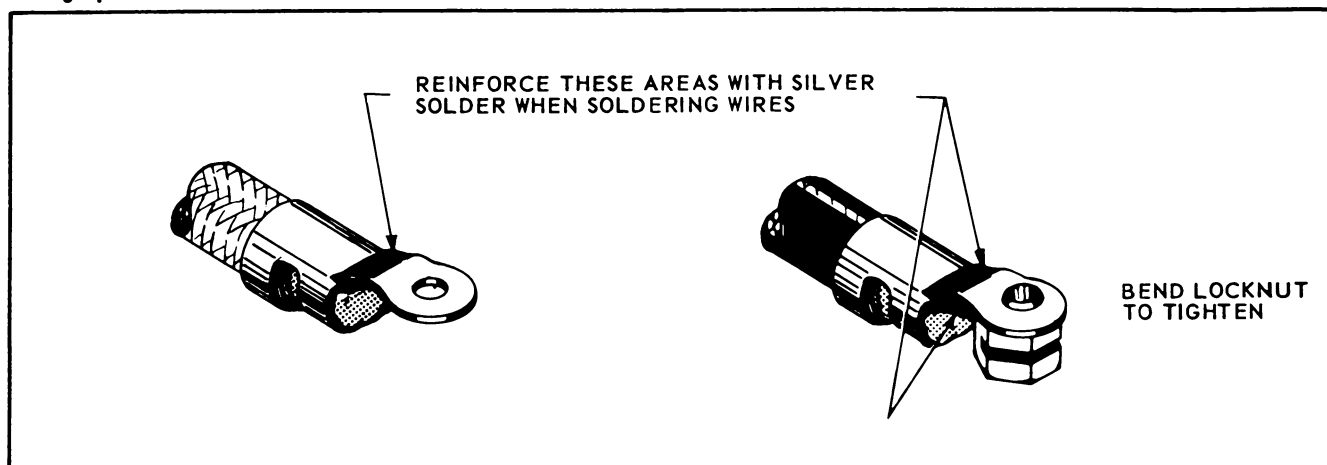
Reinforcing Solder on "AN" 5539 Terminals
